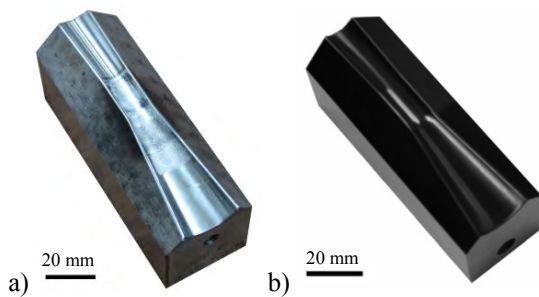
Rotary swaging tools; a) conventional tool, b) coated tool.
